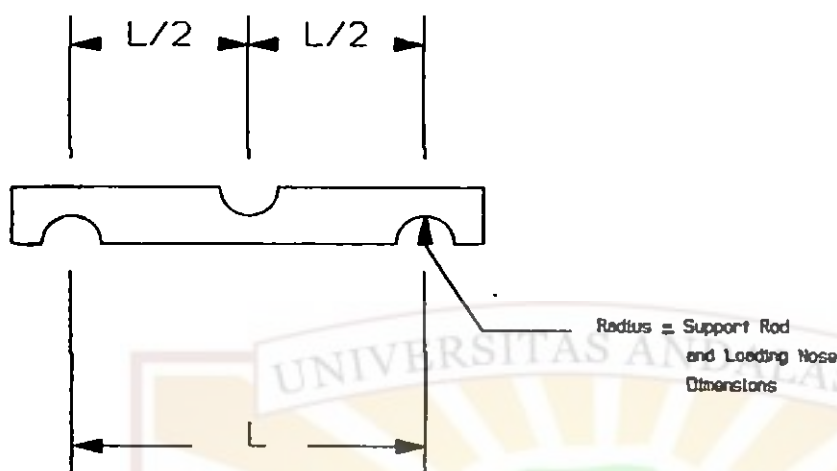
Fixture Used to Set Loading Nose and Support Spacing and Alignment
